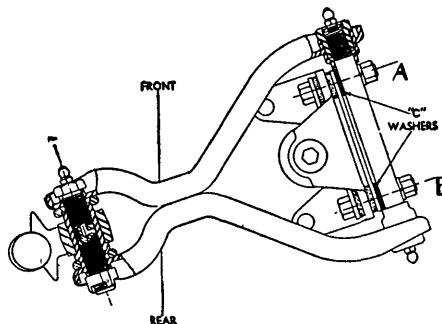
Castor and camber adjustments. Typical of all 1941-51 models except 1941-42 "600" and Rambler
